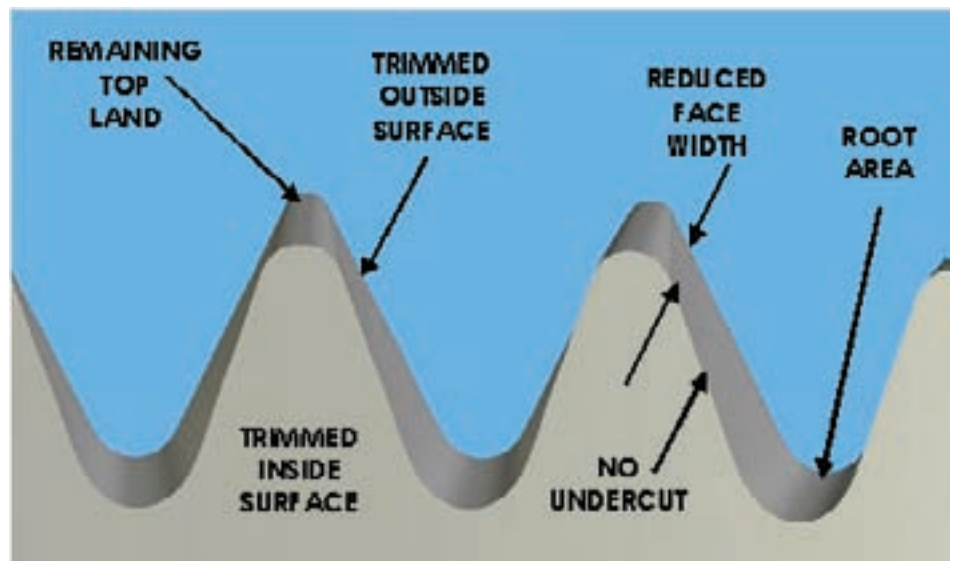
CAD-generated face gear model with trimmed inside and outside diameters.
